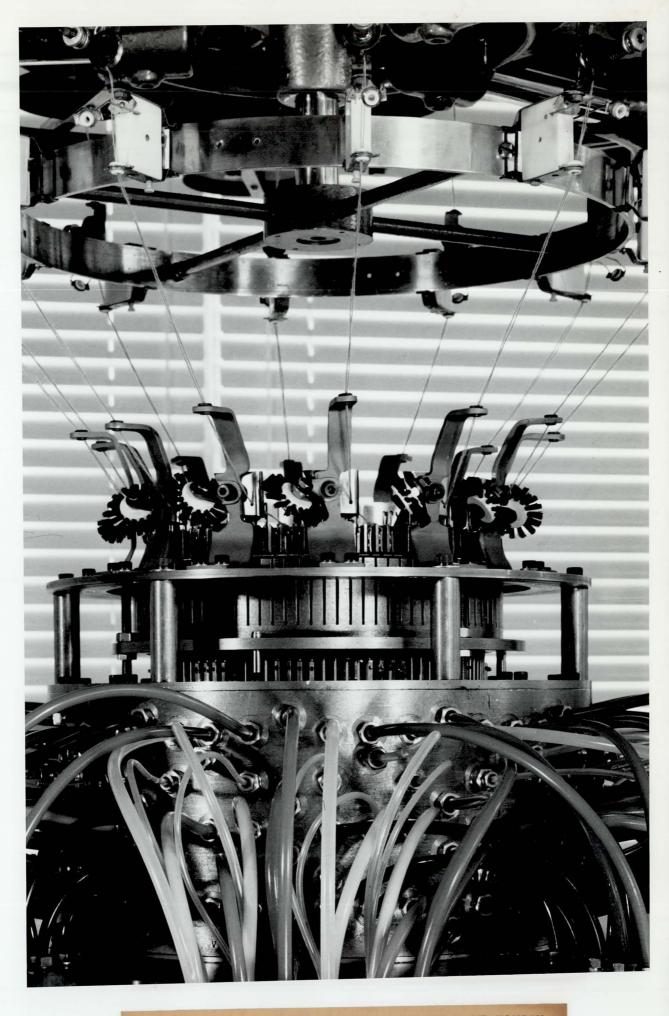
ACTUATOR BLOCK AND KNITTING MECHANISM
